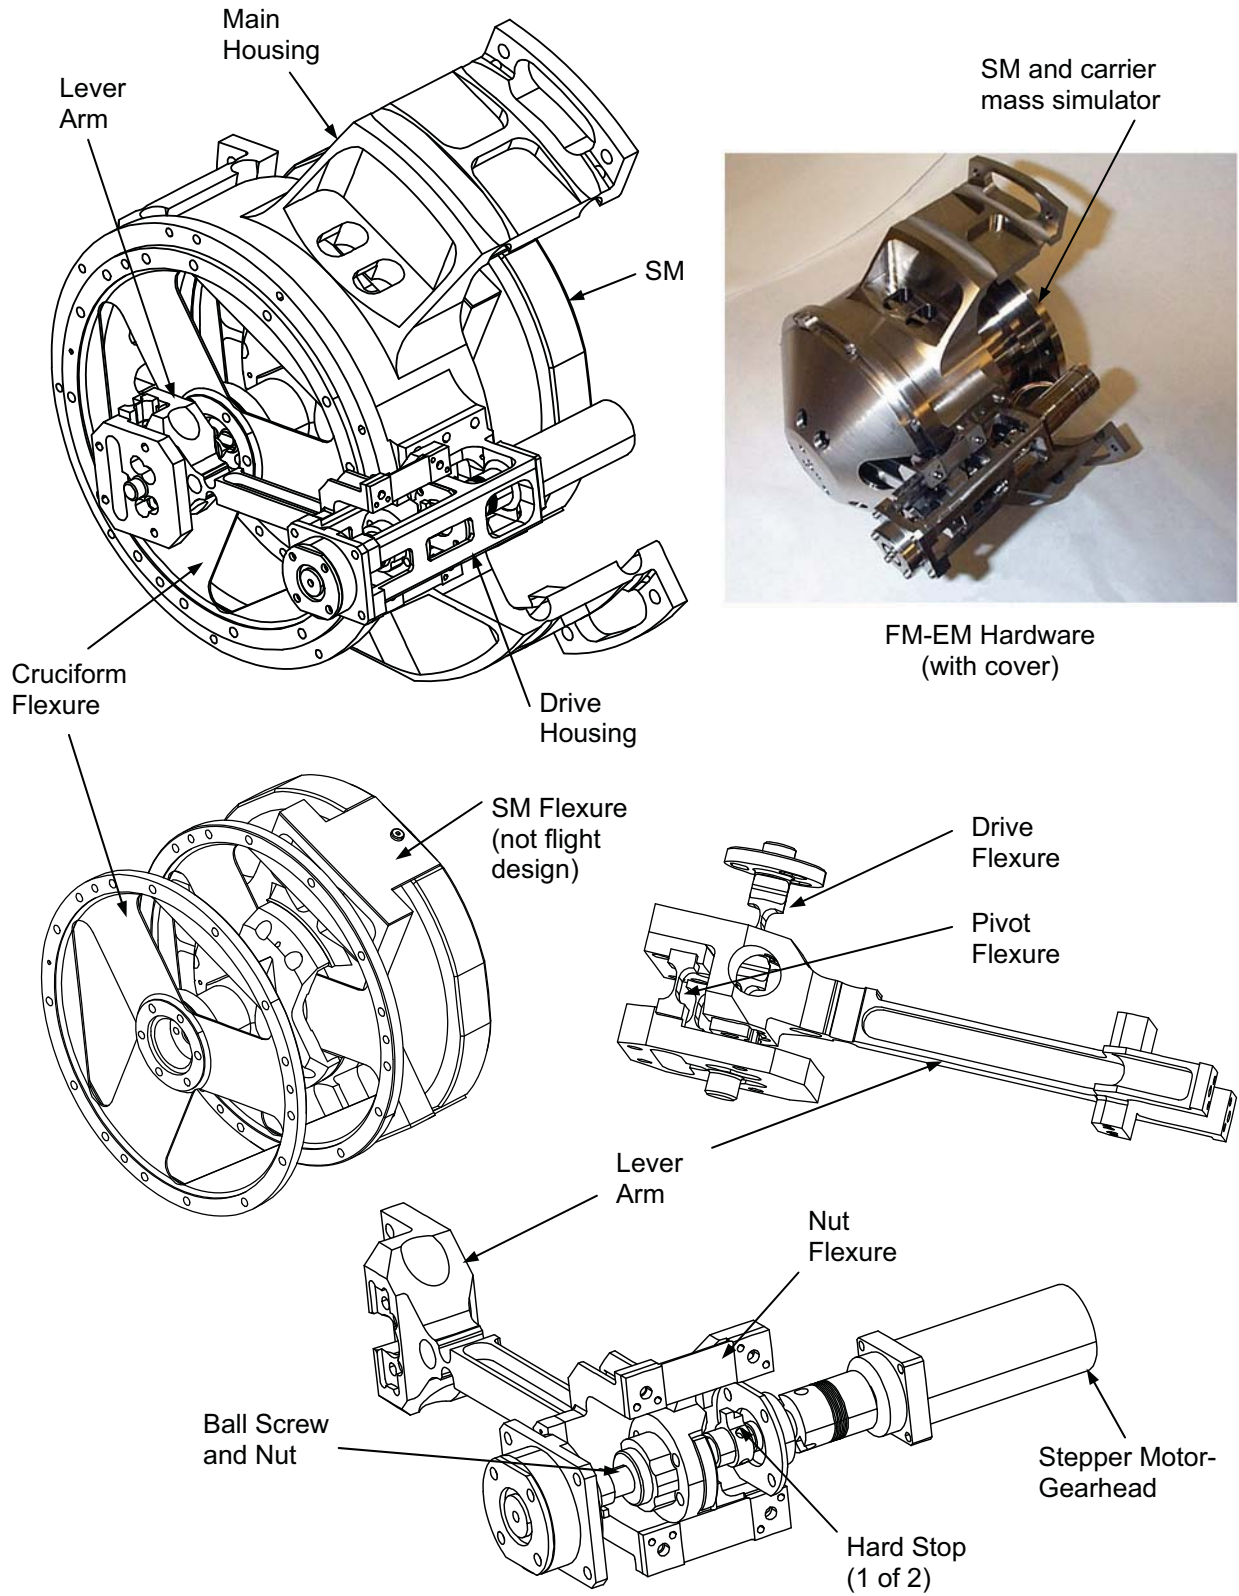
Focus Mechanism Engineering Model (FM-EM)
